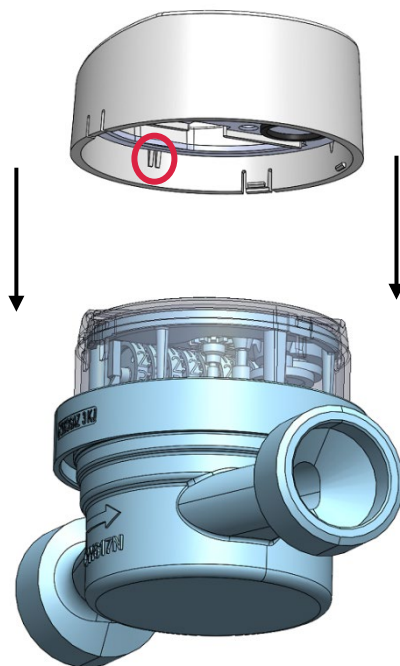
View of the OP-O4-1a module, before mounting on the water meter.
